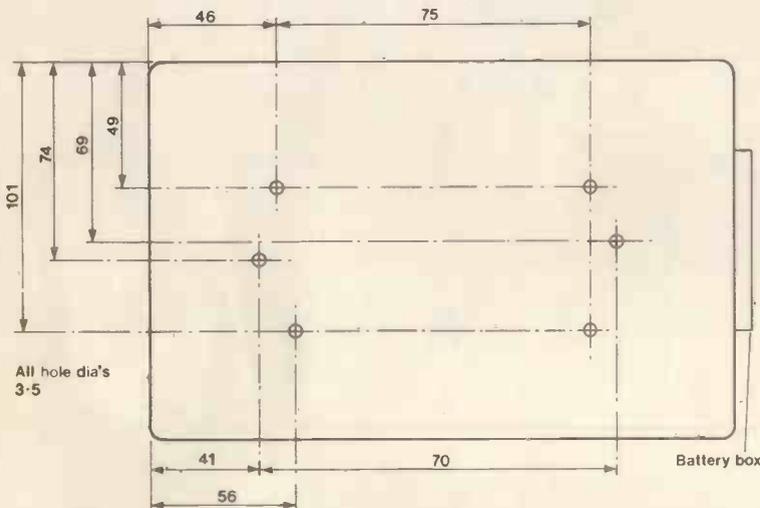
(c). Drilling of case bottom moulding for adjustment of presets.
